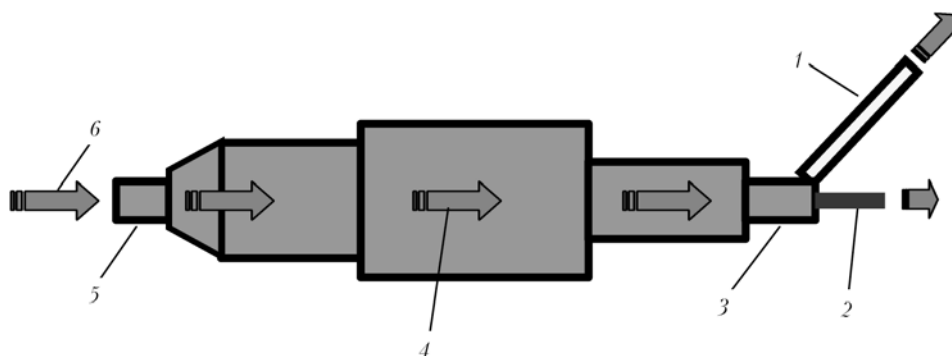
Diagram of gas flow into torch channels after flame flap: 1 — combustible gas channel; 2 — injection channel; 3 — mixing chamber; 4 — in tip tube; 5 — in nozzle; 6 — flame front motion
